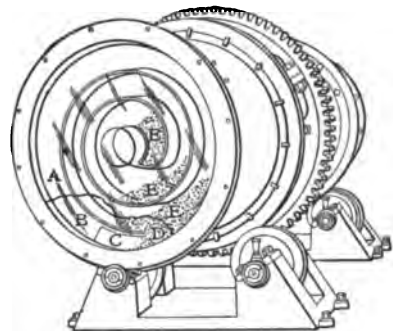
MODEL SHOWING SPIRAL FEED OF ABBÉ TUBE MILL.
